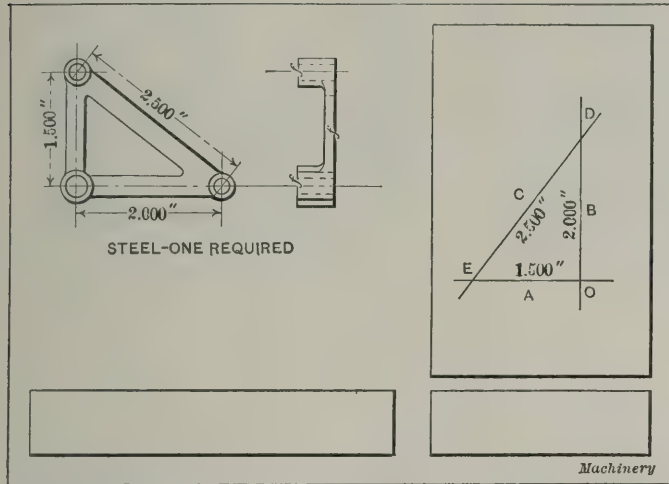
Piece to be drilled, and Jig Plate to be laid out
